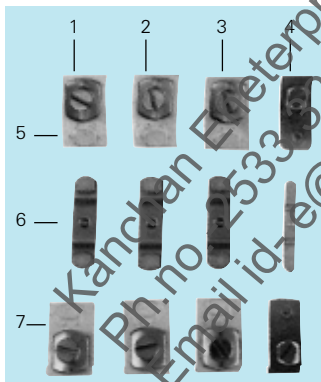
Fixed/moving, main/auxiliary contacts inspection.
